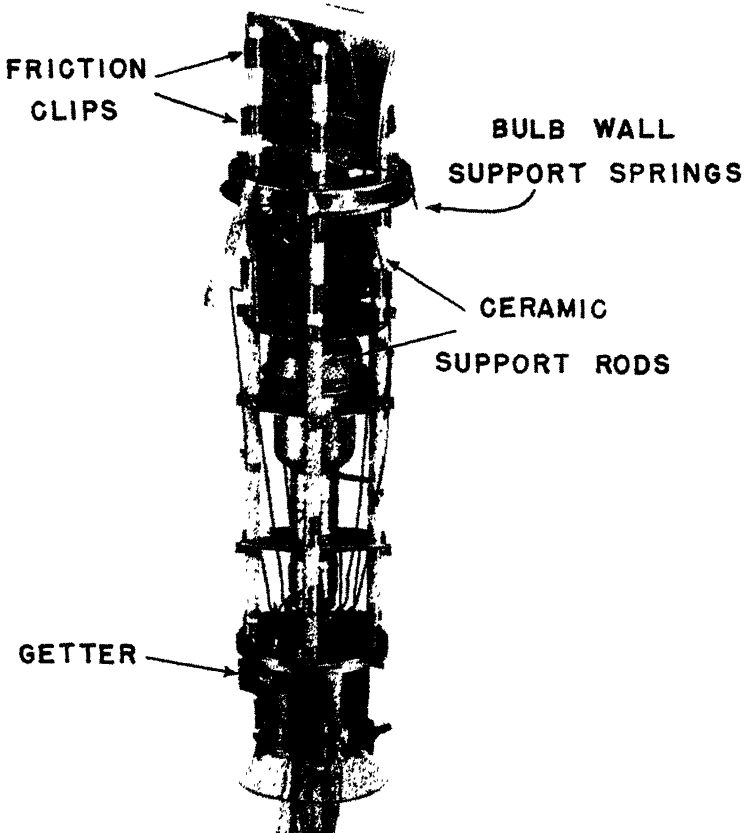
Axially insulated gun. (Courtesy of E.M.I. England.)
